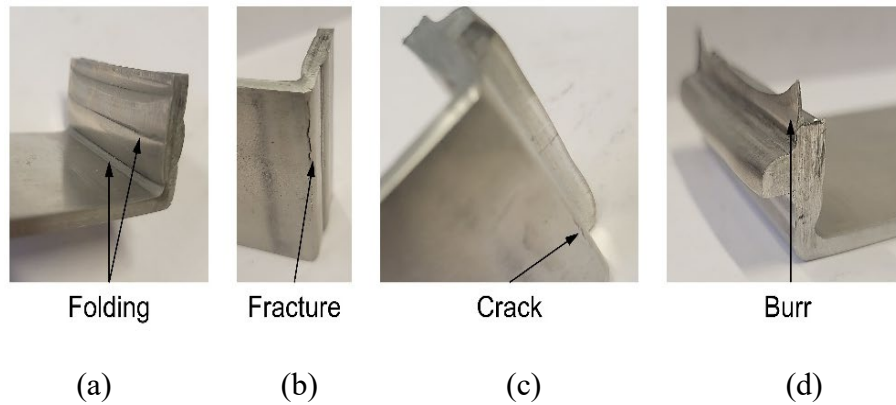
Defects: (a) folding in T6 (reference); (b) fracture in T6; (c) fracture in L_0mm (Longitudinal, 0 mm overlap); and (d) burr in the LHT specimens.
